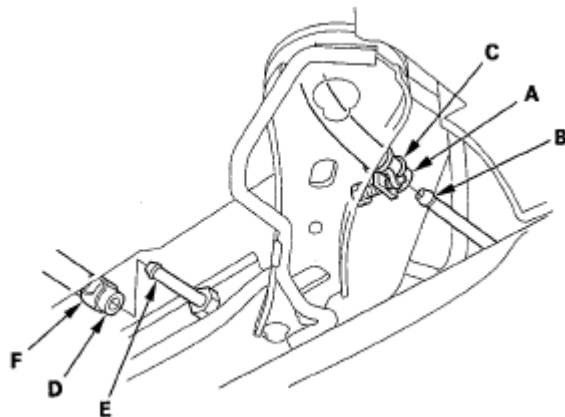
Identifying Power Steering Fluid Hose, Hose Clamp, ATF Cooler Hose And ATF Cooler
